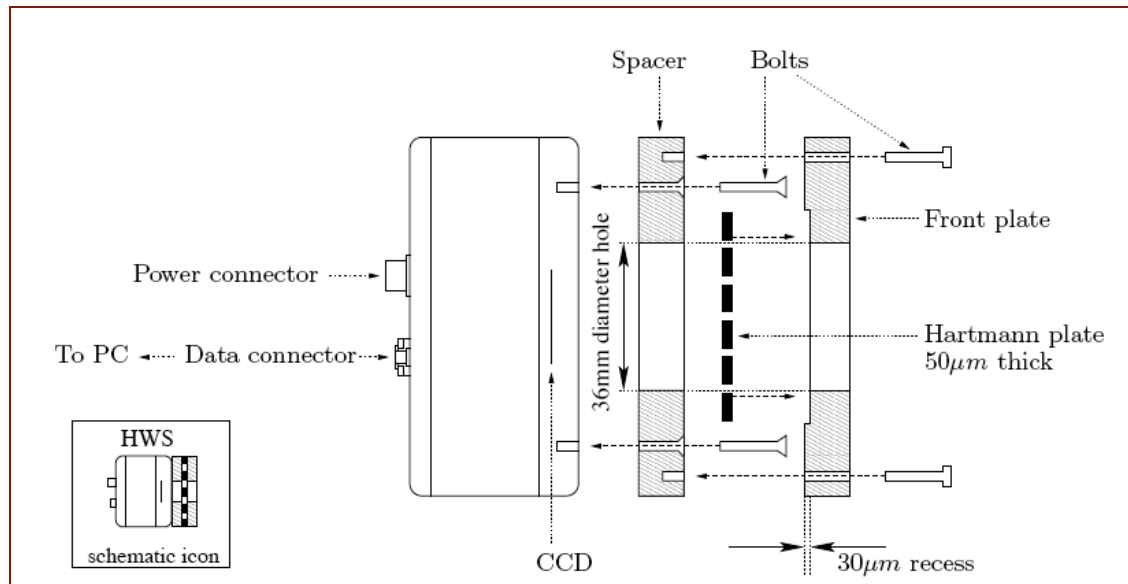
Exploded view of the University of Adelaide Hartmann sensor.
